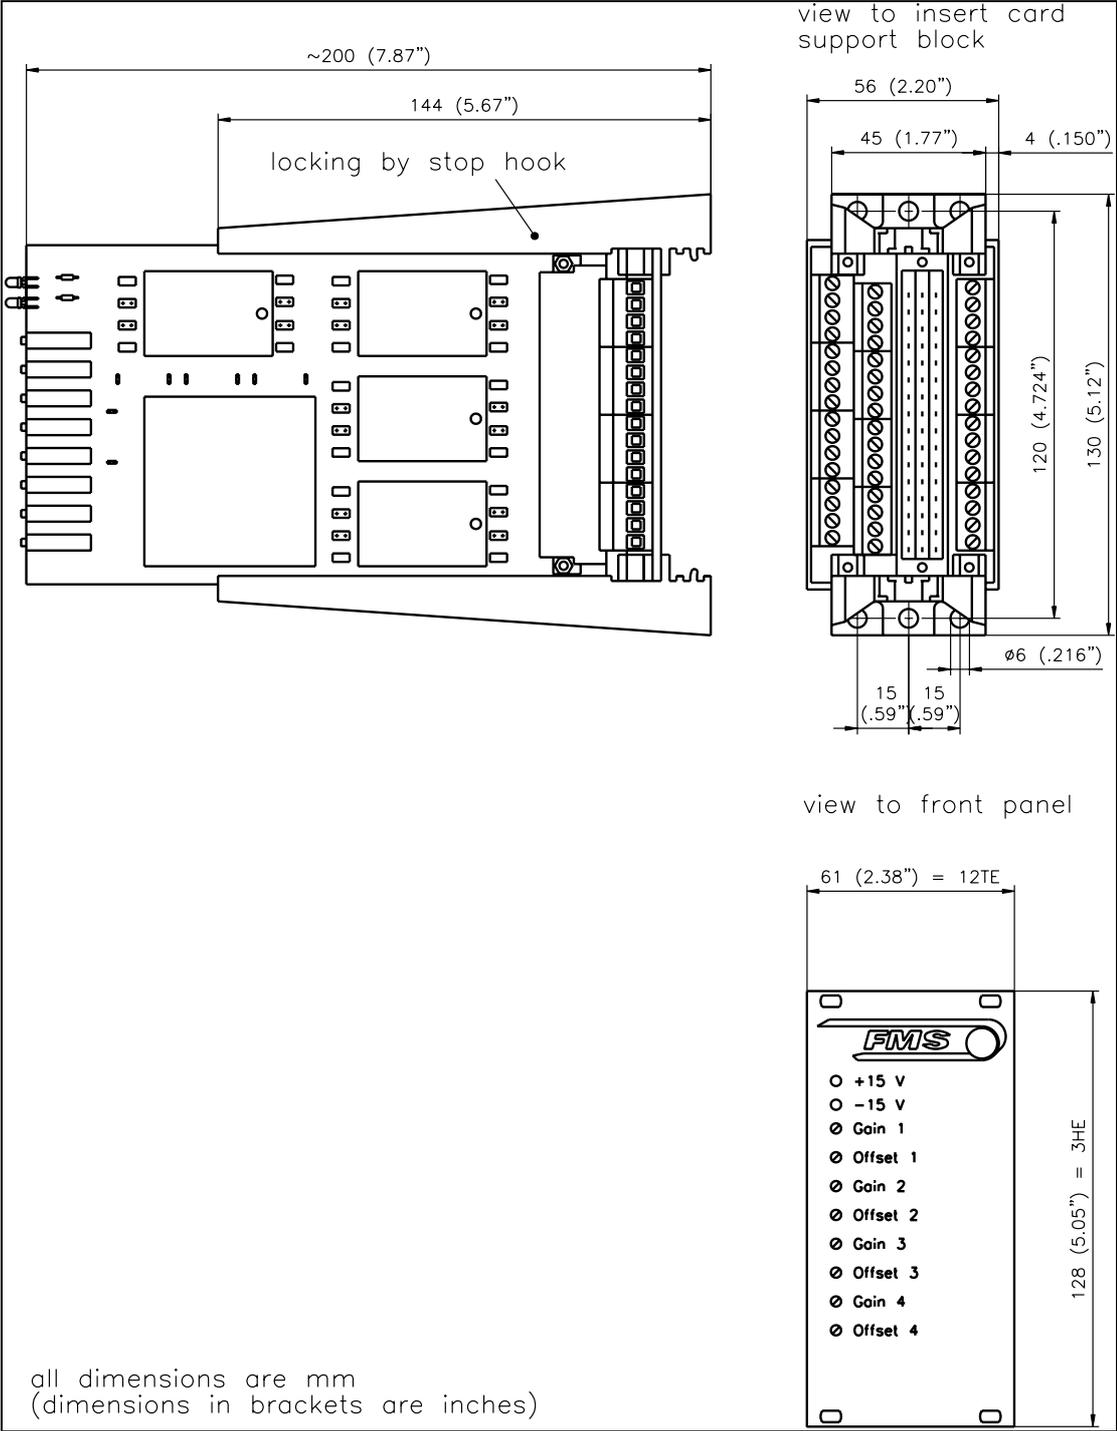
Dimensions. The insert card support block EMGZ555959 has to be ordered separately. The aluminium front panel is optional. E300003us
